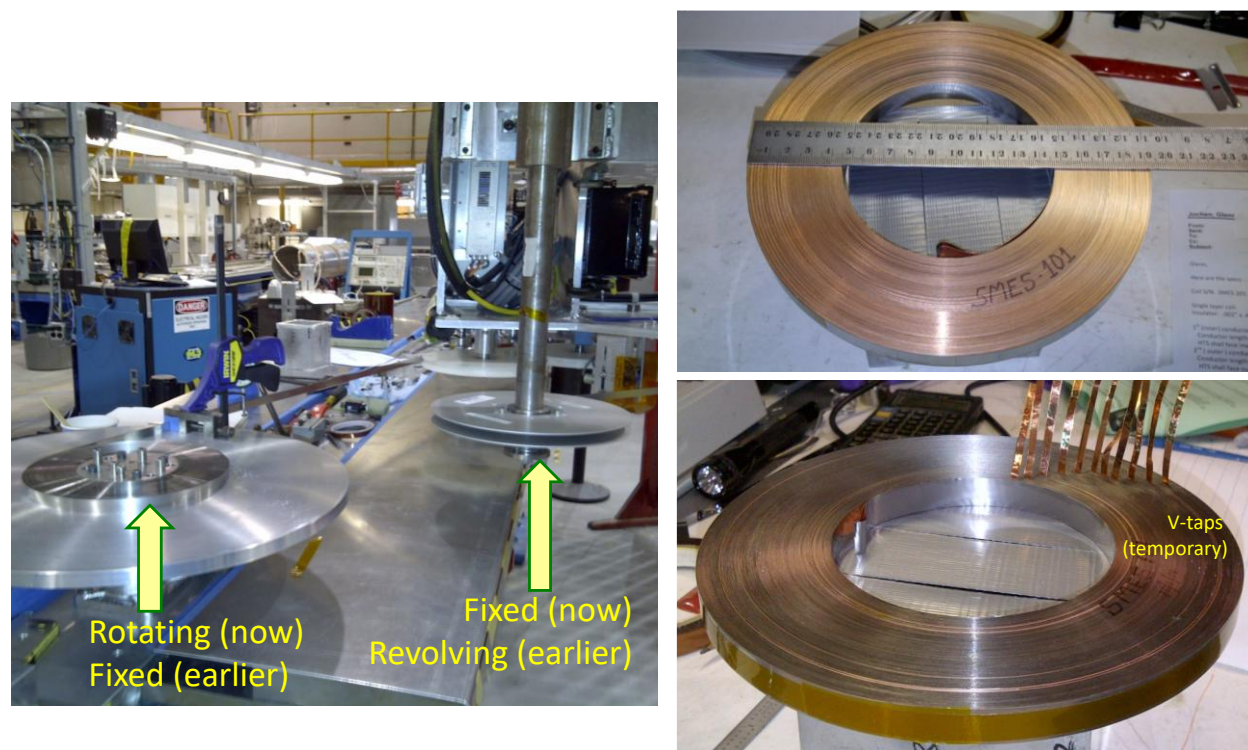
Updated coil wind machine (left side) and two sides of a coil (right side) wound with this machine. Bottom part of the picture on the right shows the side with a number of voltage taps.
